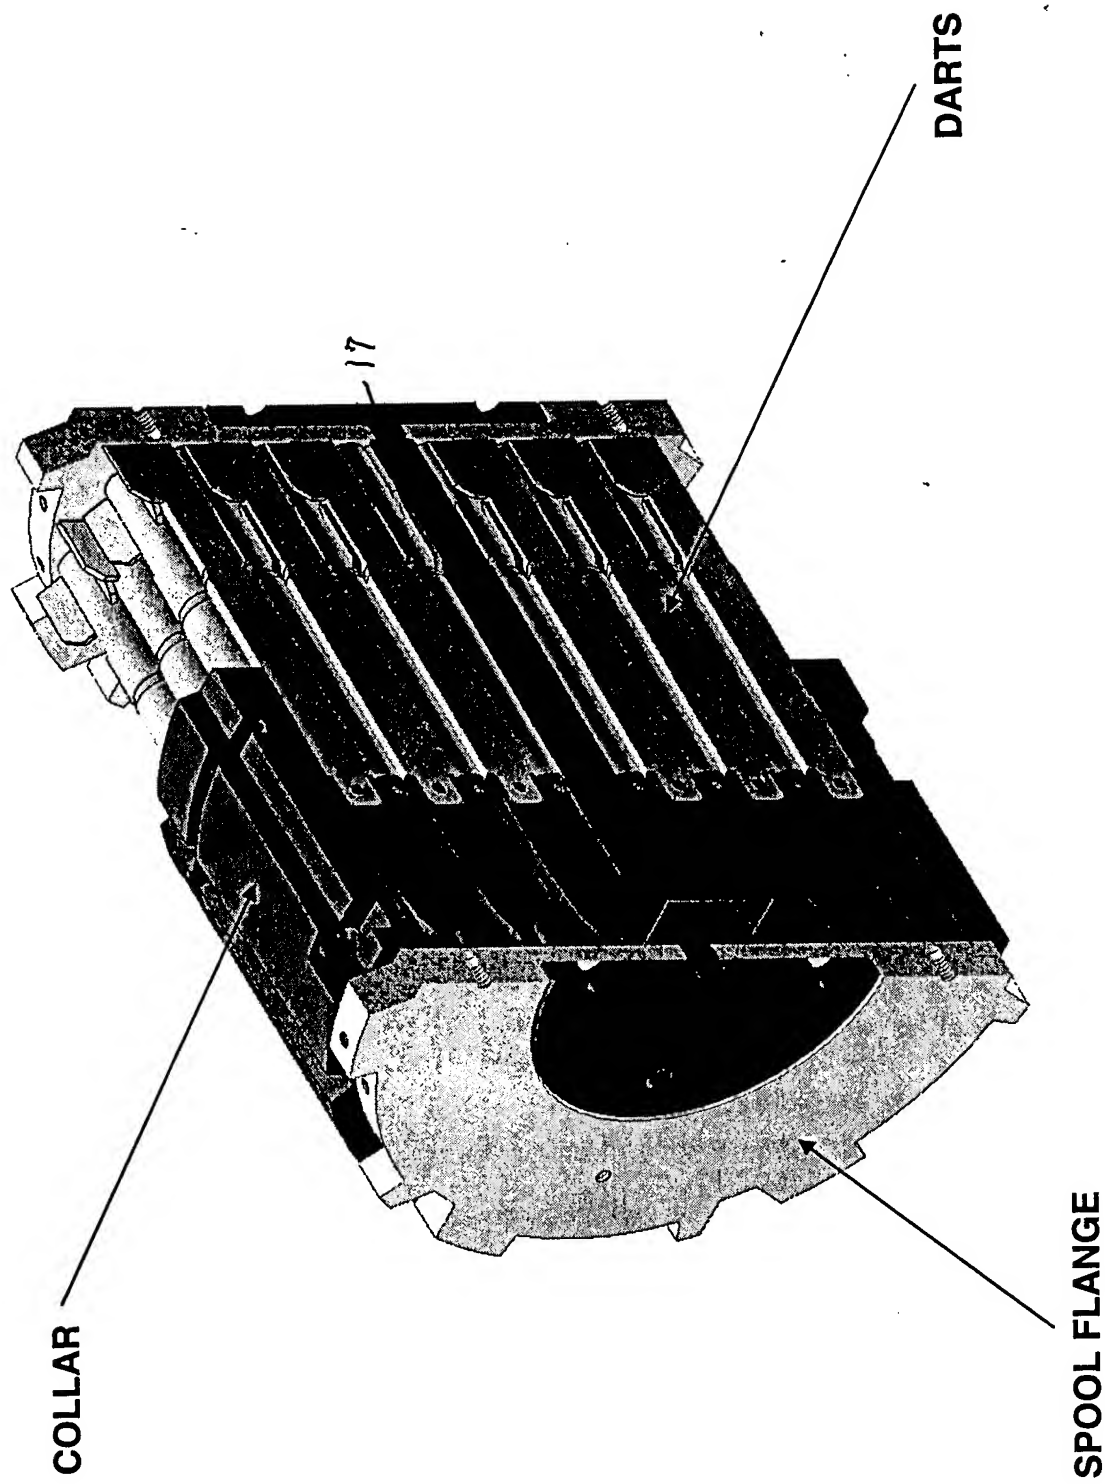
SECTIONED SPOOL ASSEMBLY
